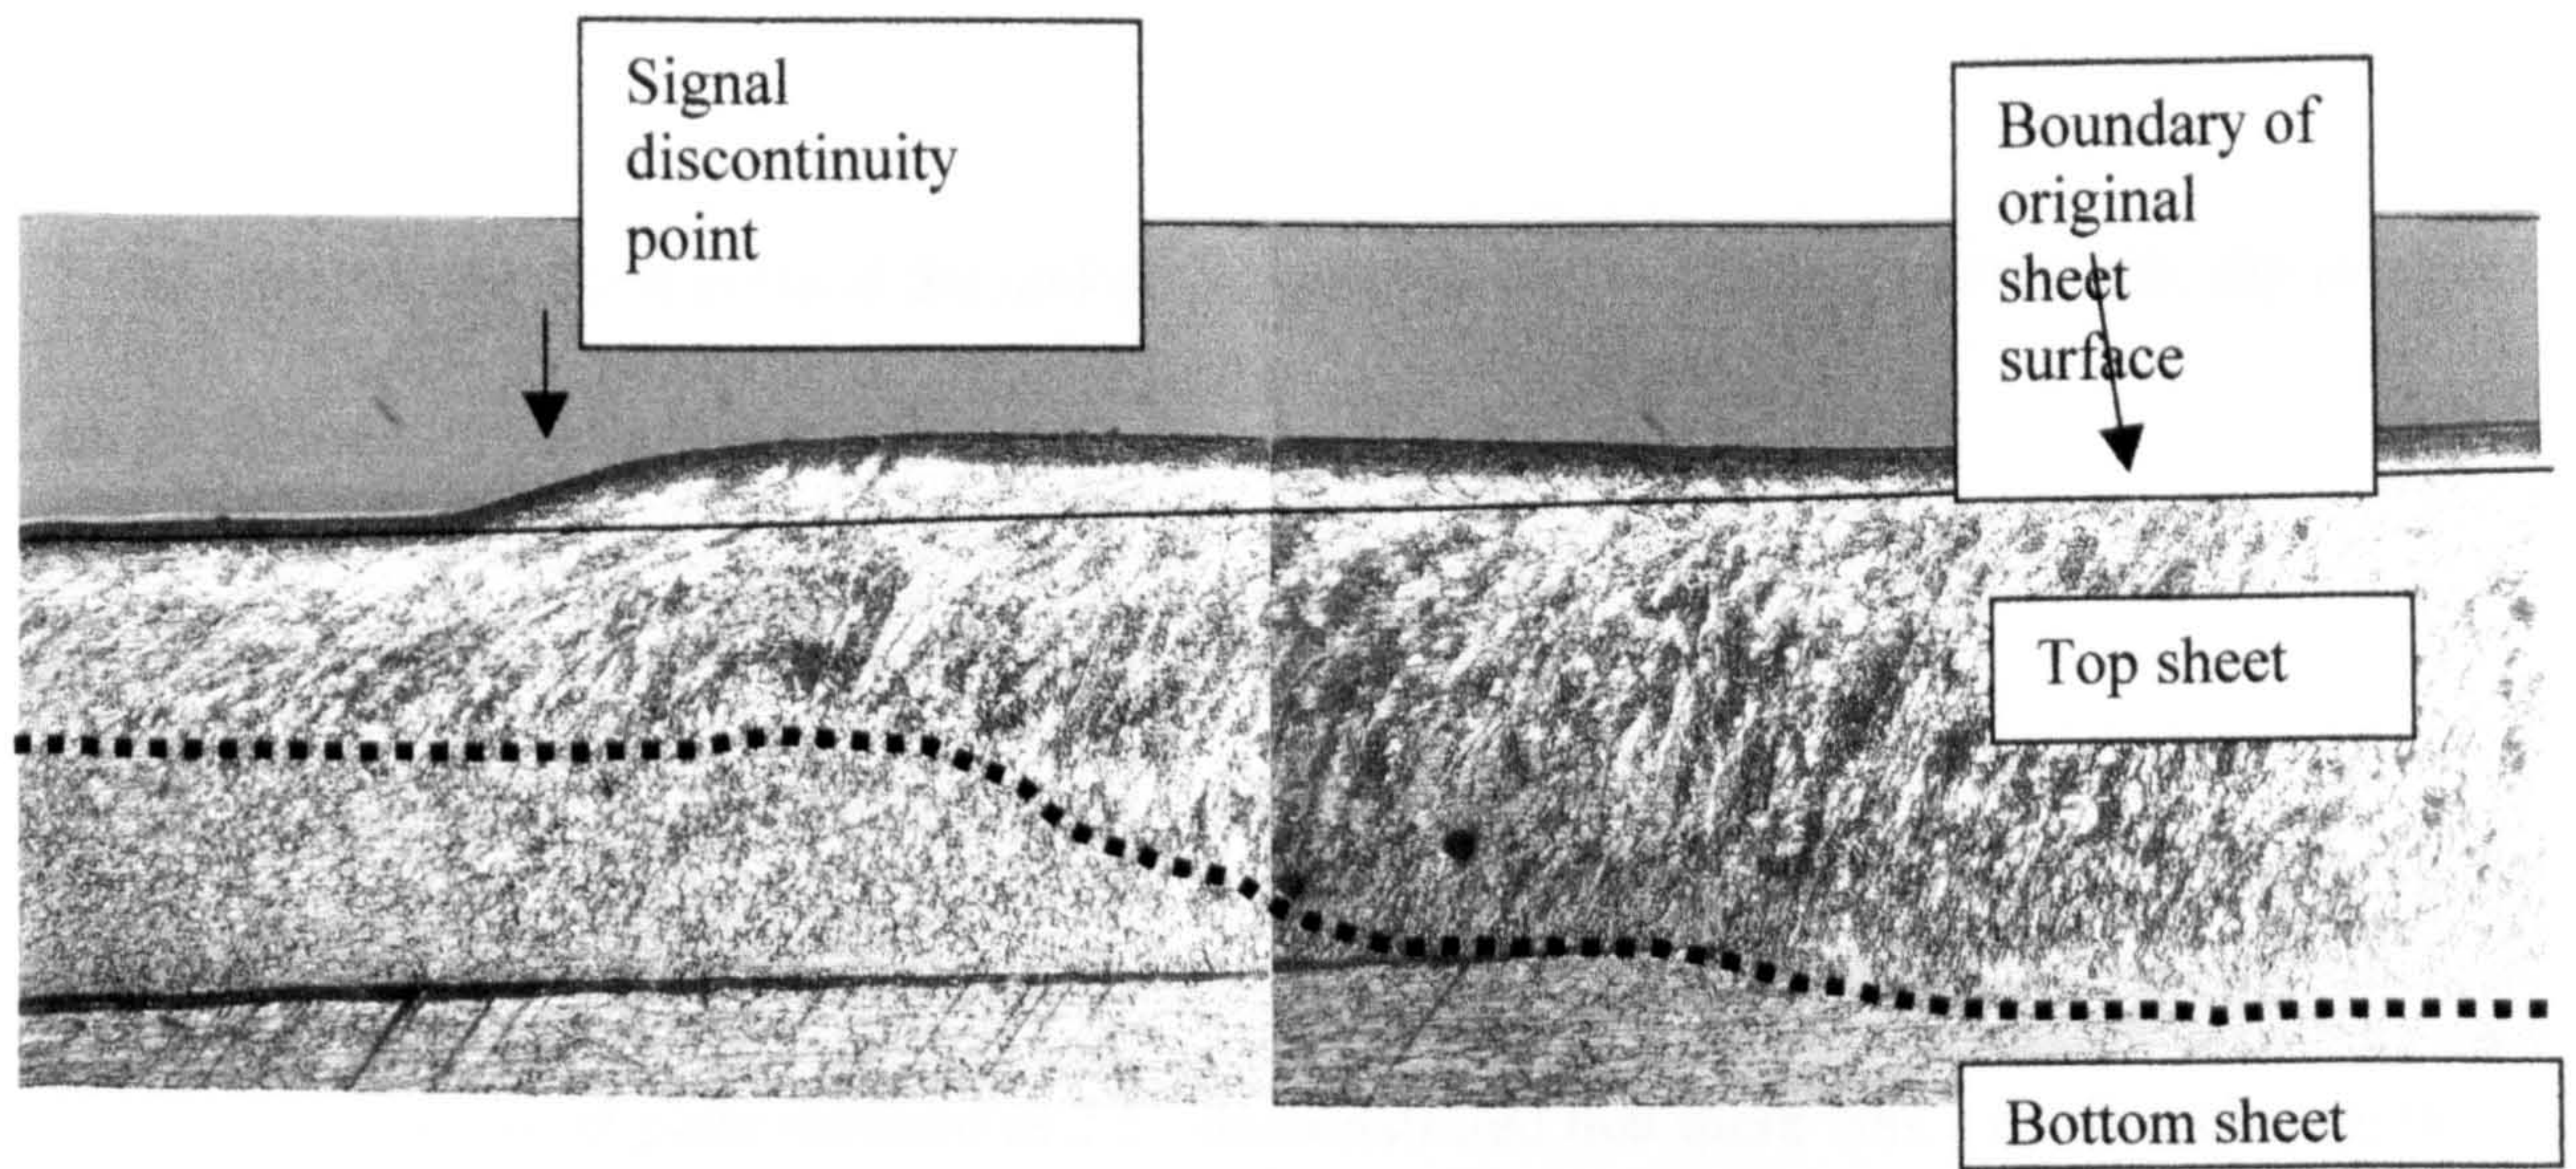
Typical longitudinal weld section (mag 50x) taken through the centre-line of a weld made in two overlapping sheets of 1.0mm steel showing the weld discontinuity point at the beginning of welding. Etched in 2% Nital. Fusion boundary profile has been highlighted for clarity.
